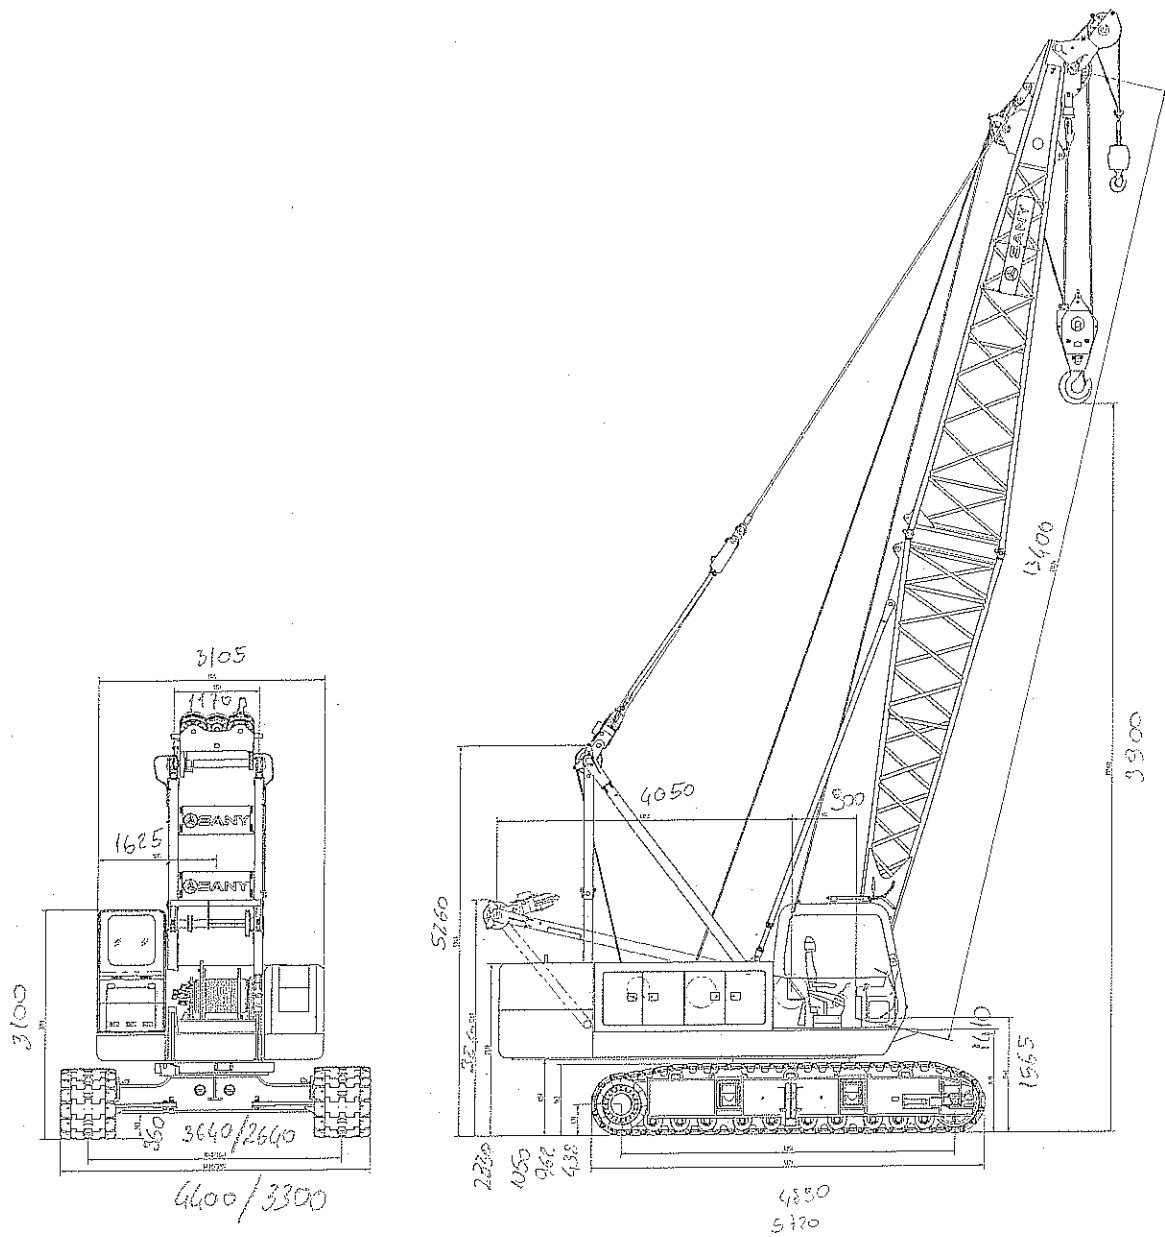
Main external dimensions of SCC500D Hydraulic Crawler Crane
